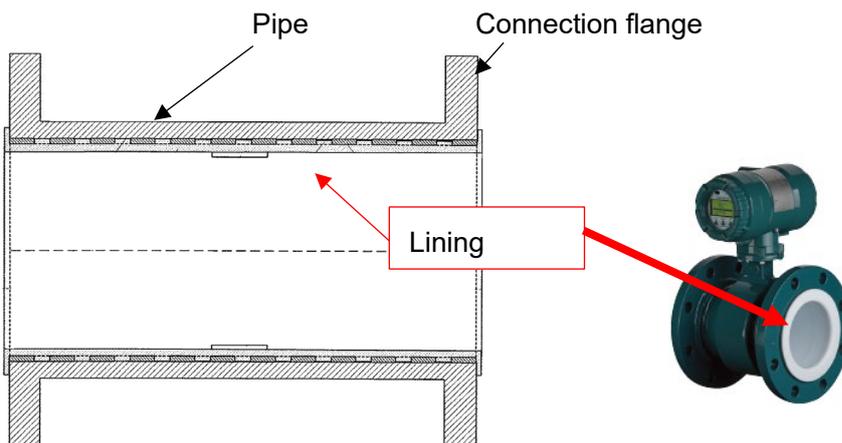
Coating and lining section of parts (diaphragm) in contact with fluid
